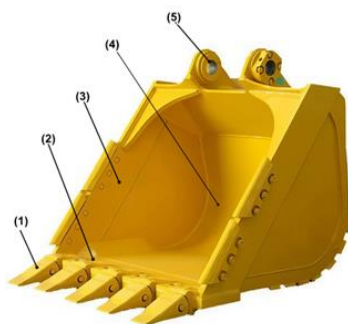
Main components of the excavation bucket: (1) bucket tooth; (2) tooth holder; (3) bucket wall; (4) bucket shell; (5) bucket attachment pin
